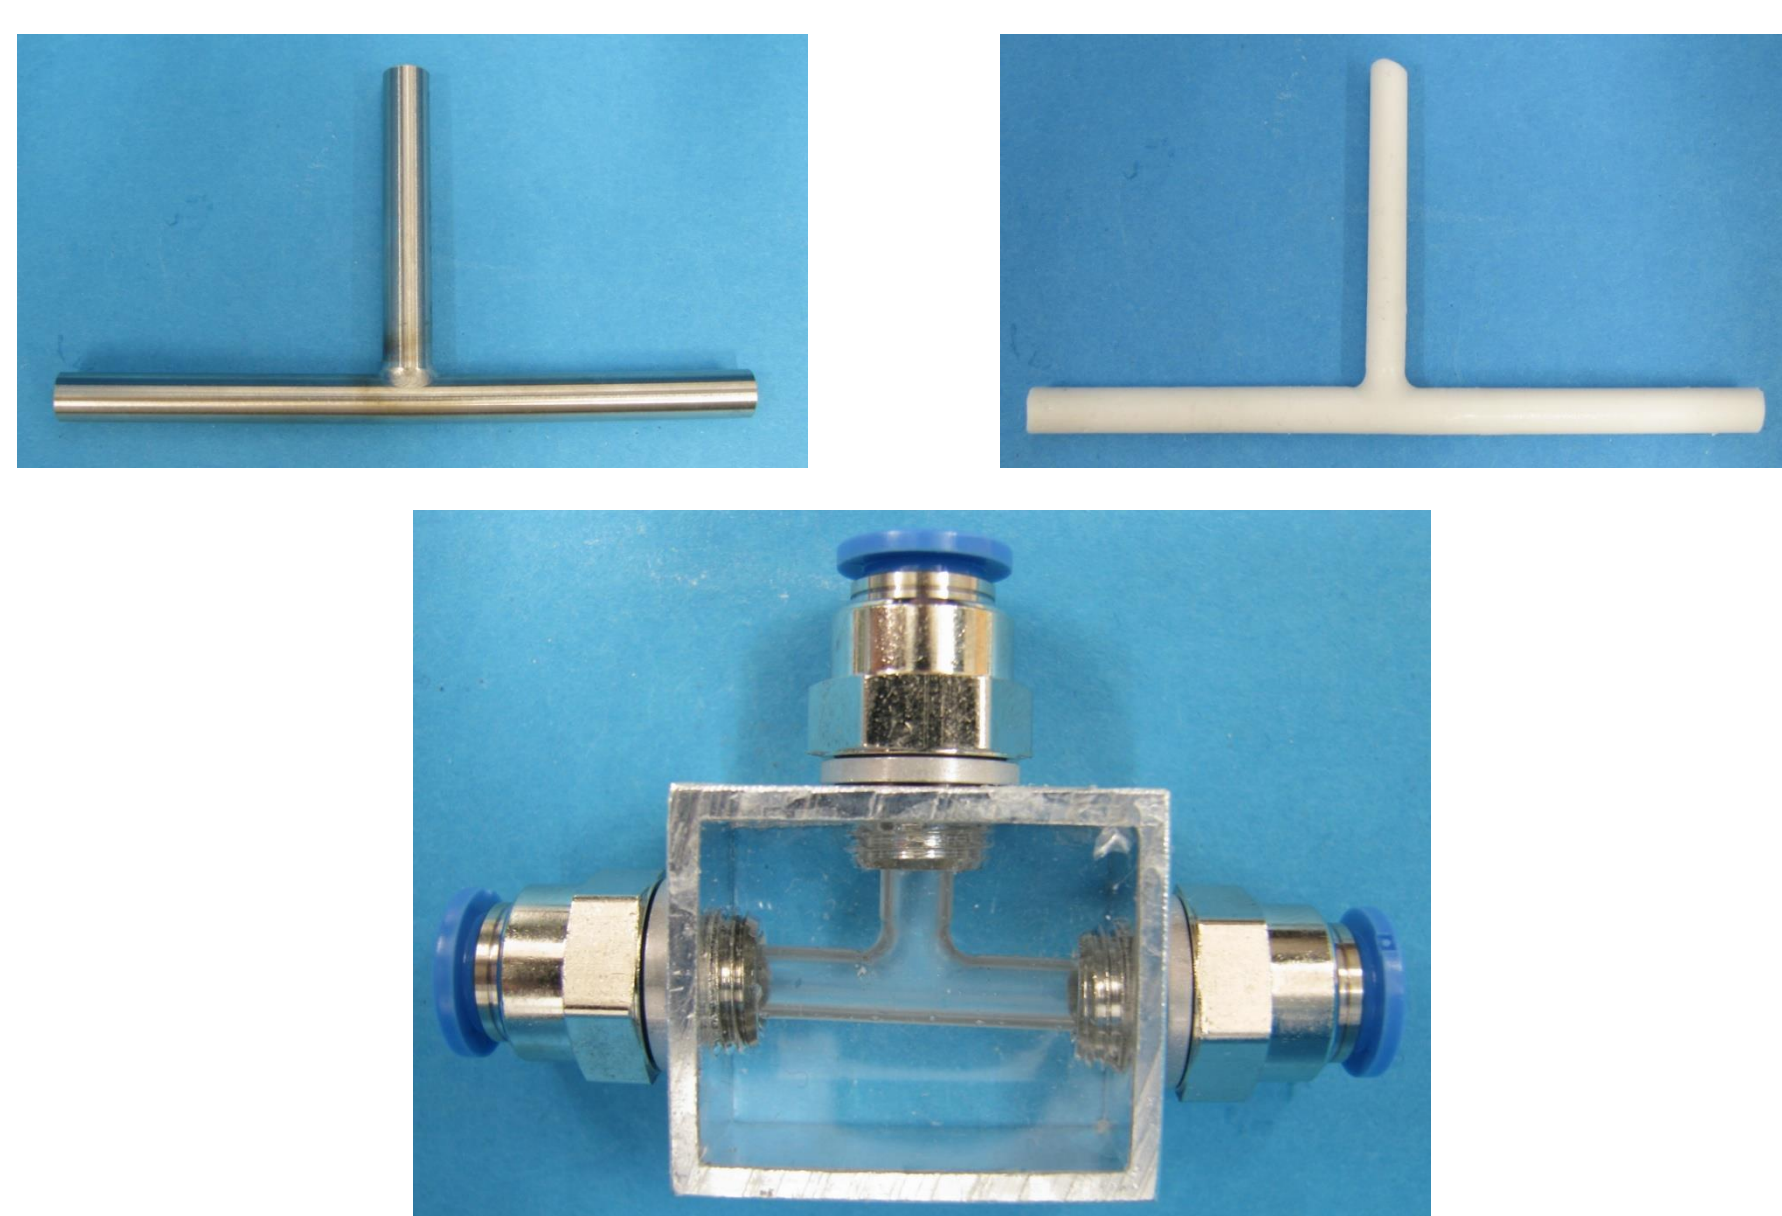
Silicone impression of a welded manifold with a 90° angle
